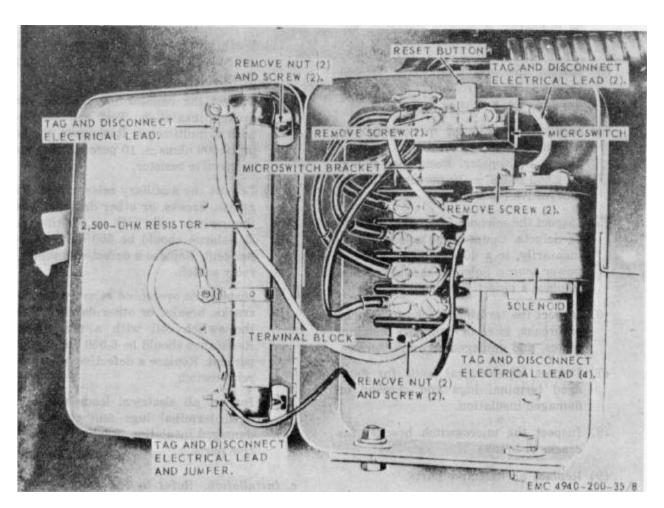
Engine overspeed relay resistor, microswitch, solenoid, and terminal block, model SECM, removal and installation.
